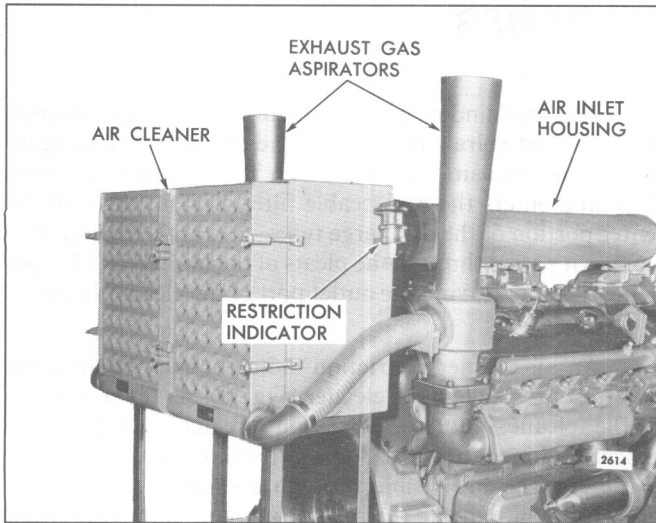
Typical Dry Type Air Cleaner Mounting
